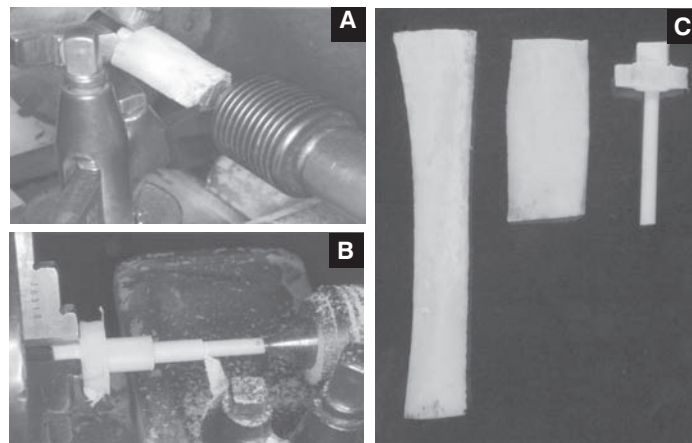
Illustration of the main steps for producing screws in lathe. A bone sample was fixed on the horizontal lathe chuck, keeping distal end centered at the opposite end (A). The steel tool moved towards the bone piece, progressively removing bone layers (B), until a cylindrical piece with 4.5 mm diameter was obtained (C).
